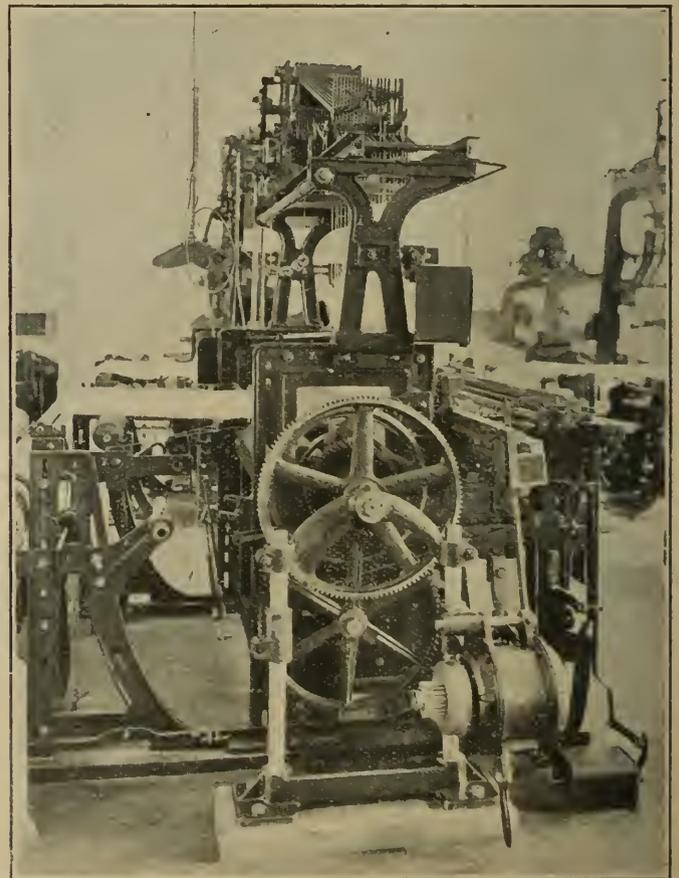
VIEW SHOWING LOOM MOTOR SWUNG OUT FOR INSPECTION OF GEAR.
